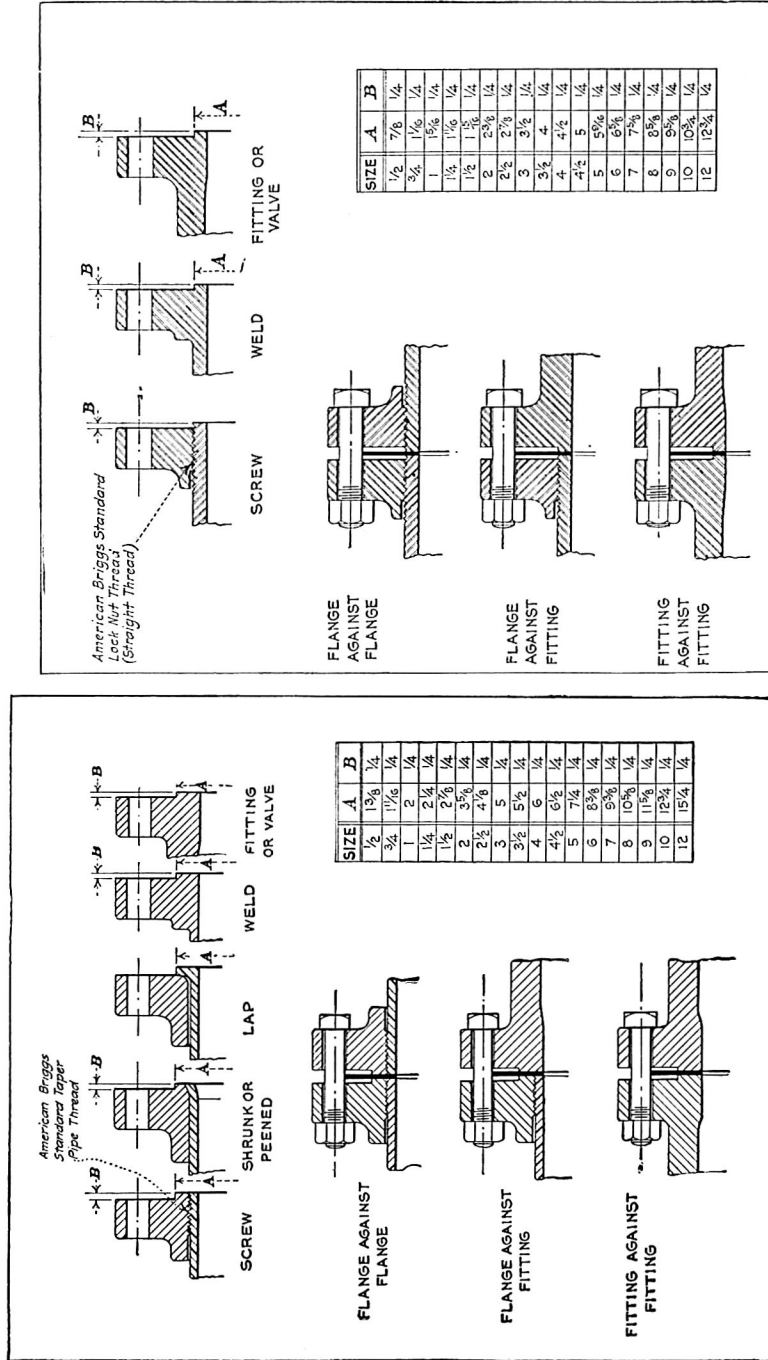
FLANGE JOINTS AND METHODS OF ATTACHING FLANGES TO PIPE, 3000-LB. HYDRAULIC AMERICAN STANDARD
